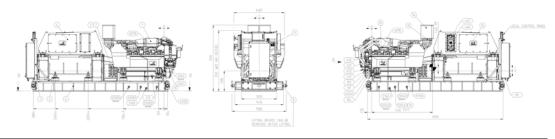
W12V14 Genset outline drawing (DAAF491140C)
